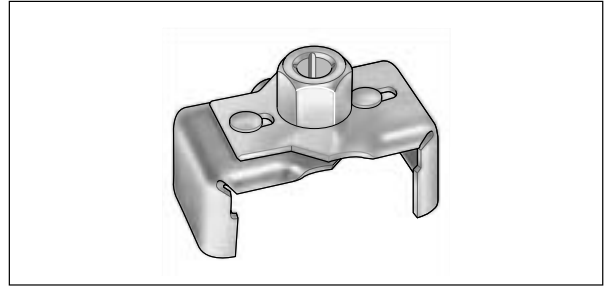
Oil Filter Wrench (Part No. HD-42311)
